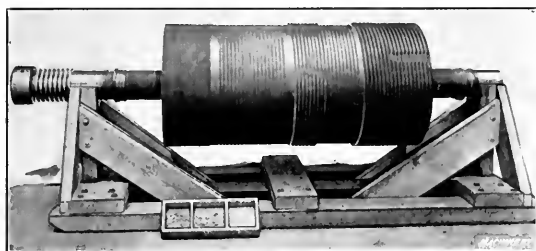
Cradle in which the Rotor was supported to remove the Old Blades
